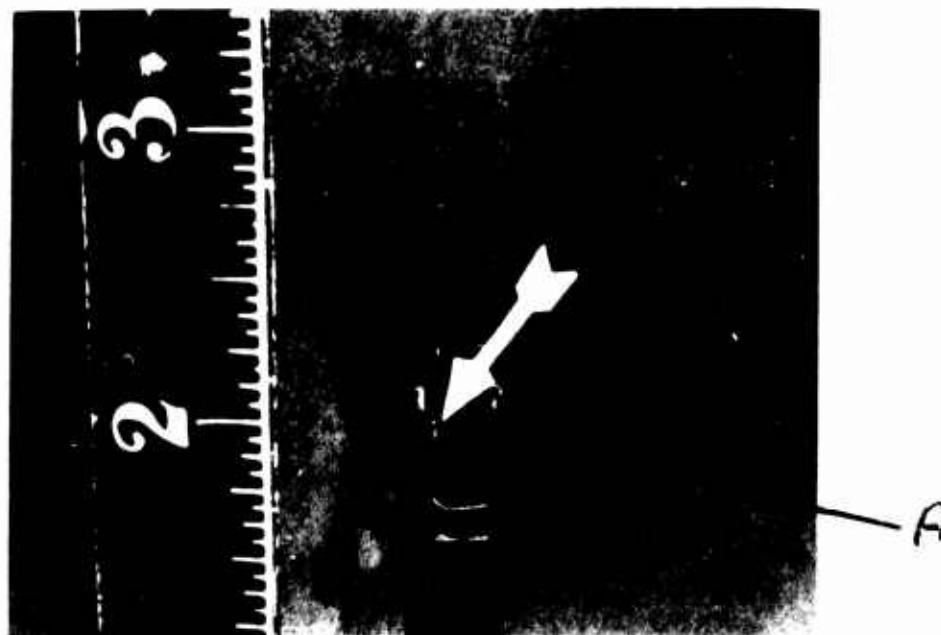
Crack (Arrow) at Location A of APG Part No. 77 (Hammer) in Thin Web of Hammer Strut Hole, before Firing.
